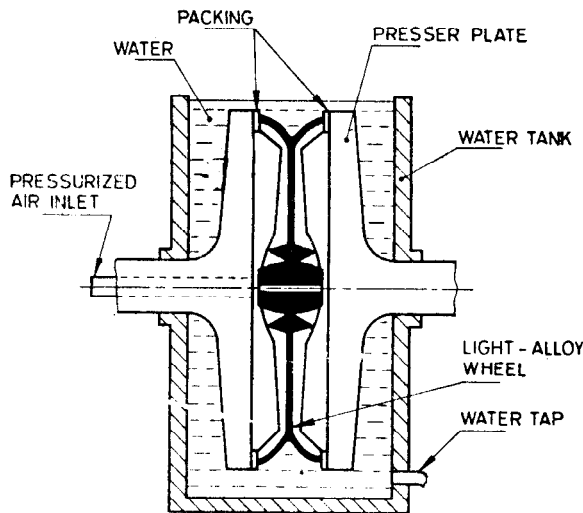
MODEL EQUIPMENT FOR AIR LEAK TEST
